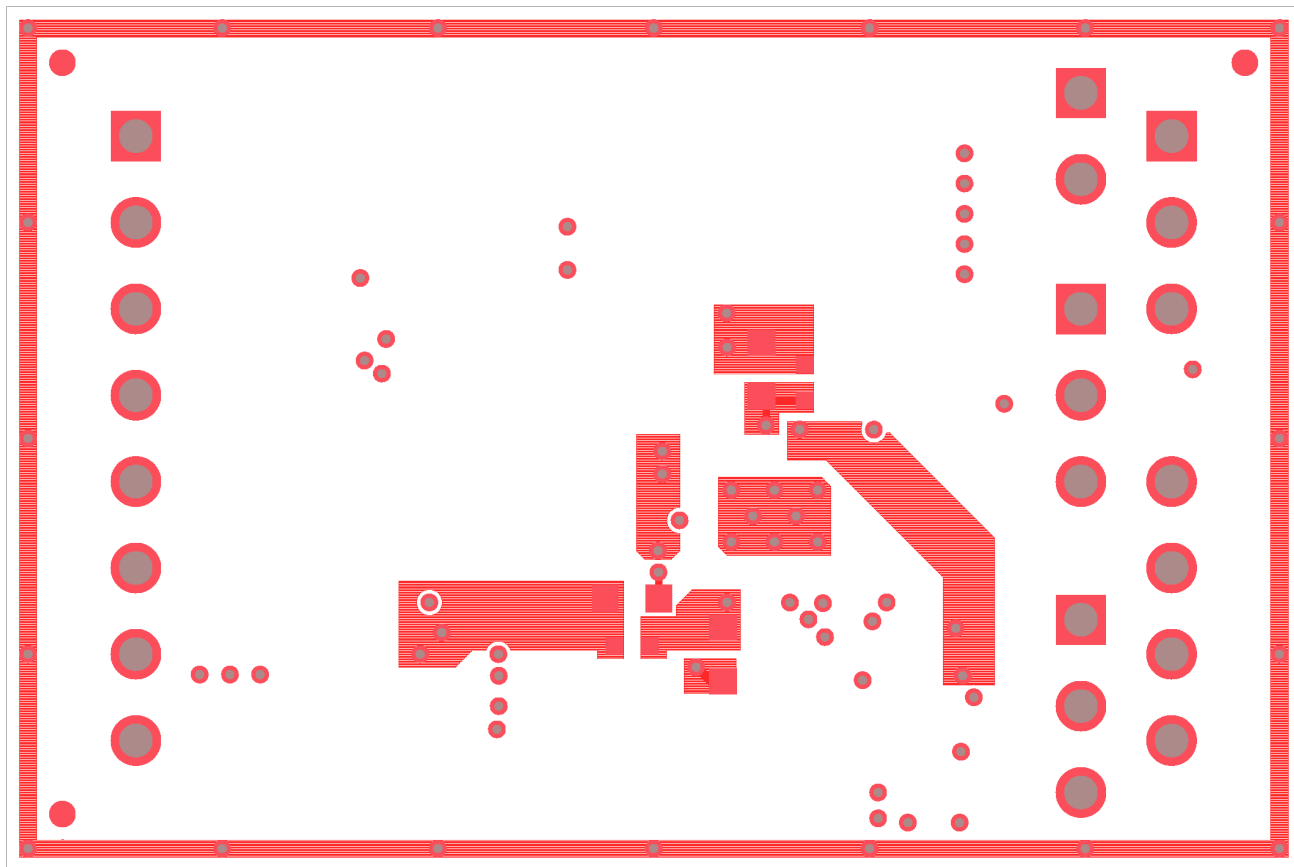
SMP-BQ24133-MVK Board Layer 4 – Bottom Side
